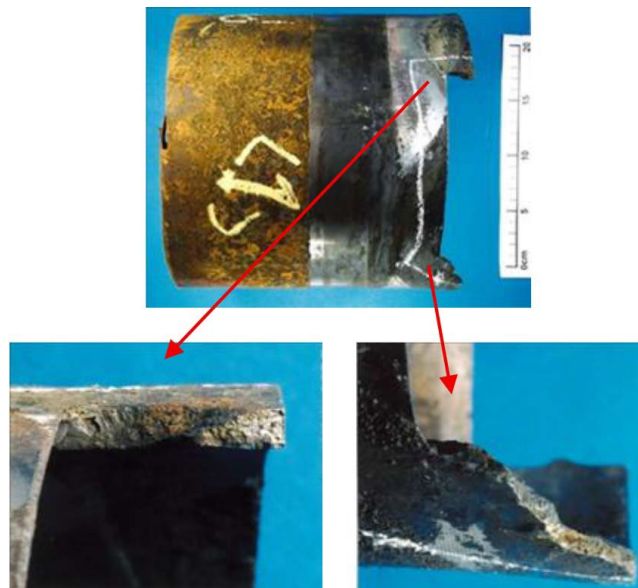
Photo showing failed burner with oxidized surfaces at fracture zone.
